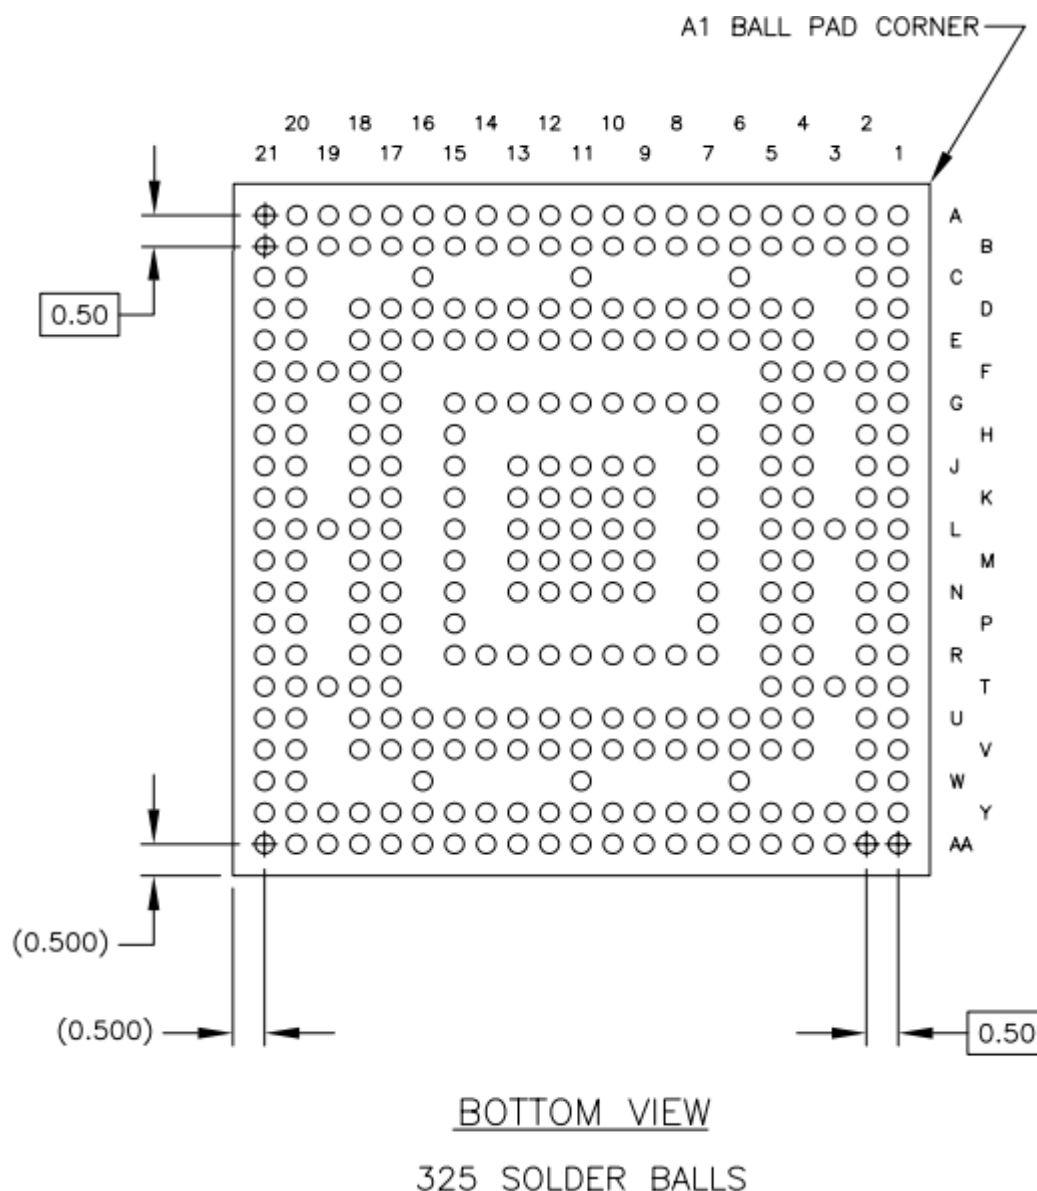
• FCS325 (11mm X 11mm) Package Bottom-View
